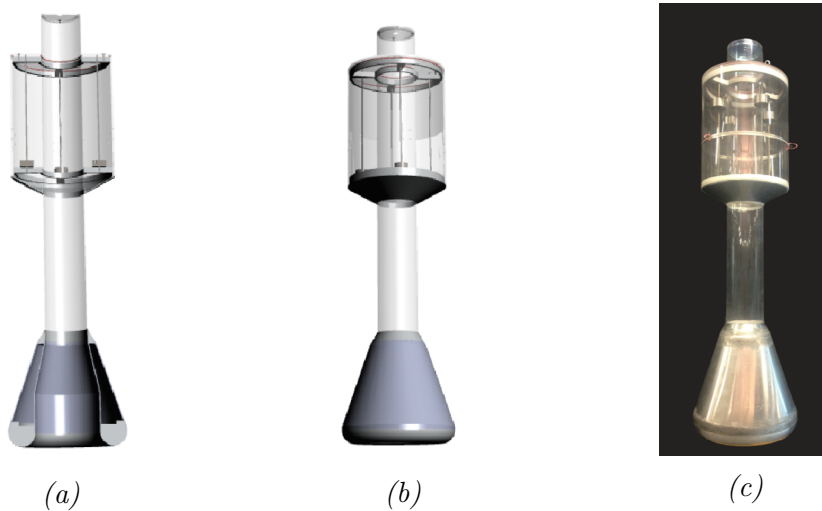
A section (a) and full view (b) of the Sparbuoy CAD model and a photograph of the assembled TM0 model built at the University of Plymouth (c).
